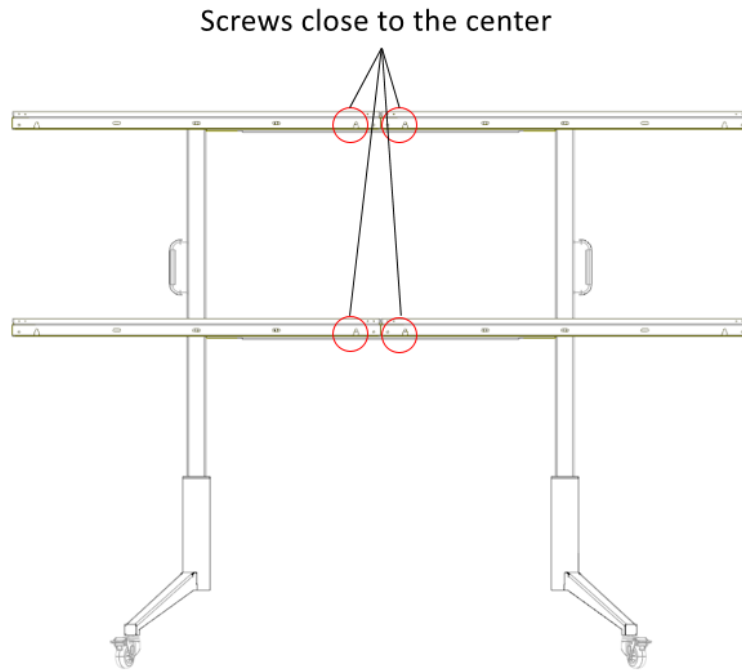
Installing Wall-Mounted Horizontal Poles Completed
